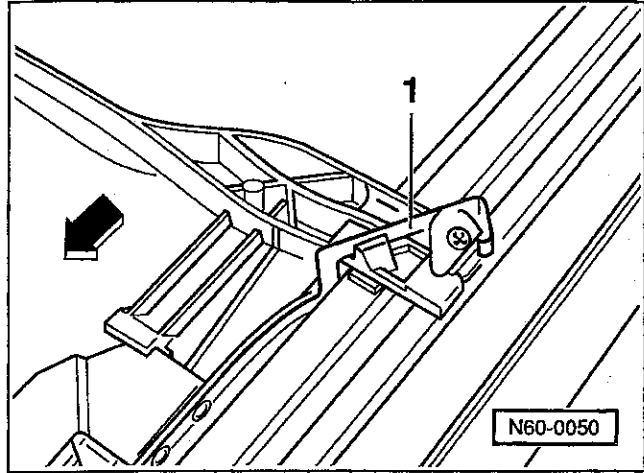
Release left and right springs (1) and pull headliner forward and out of roof cut-out.
